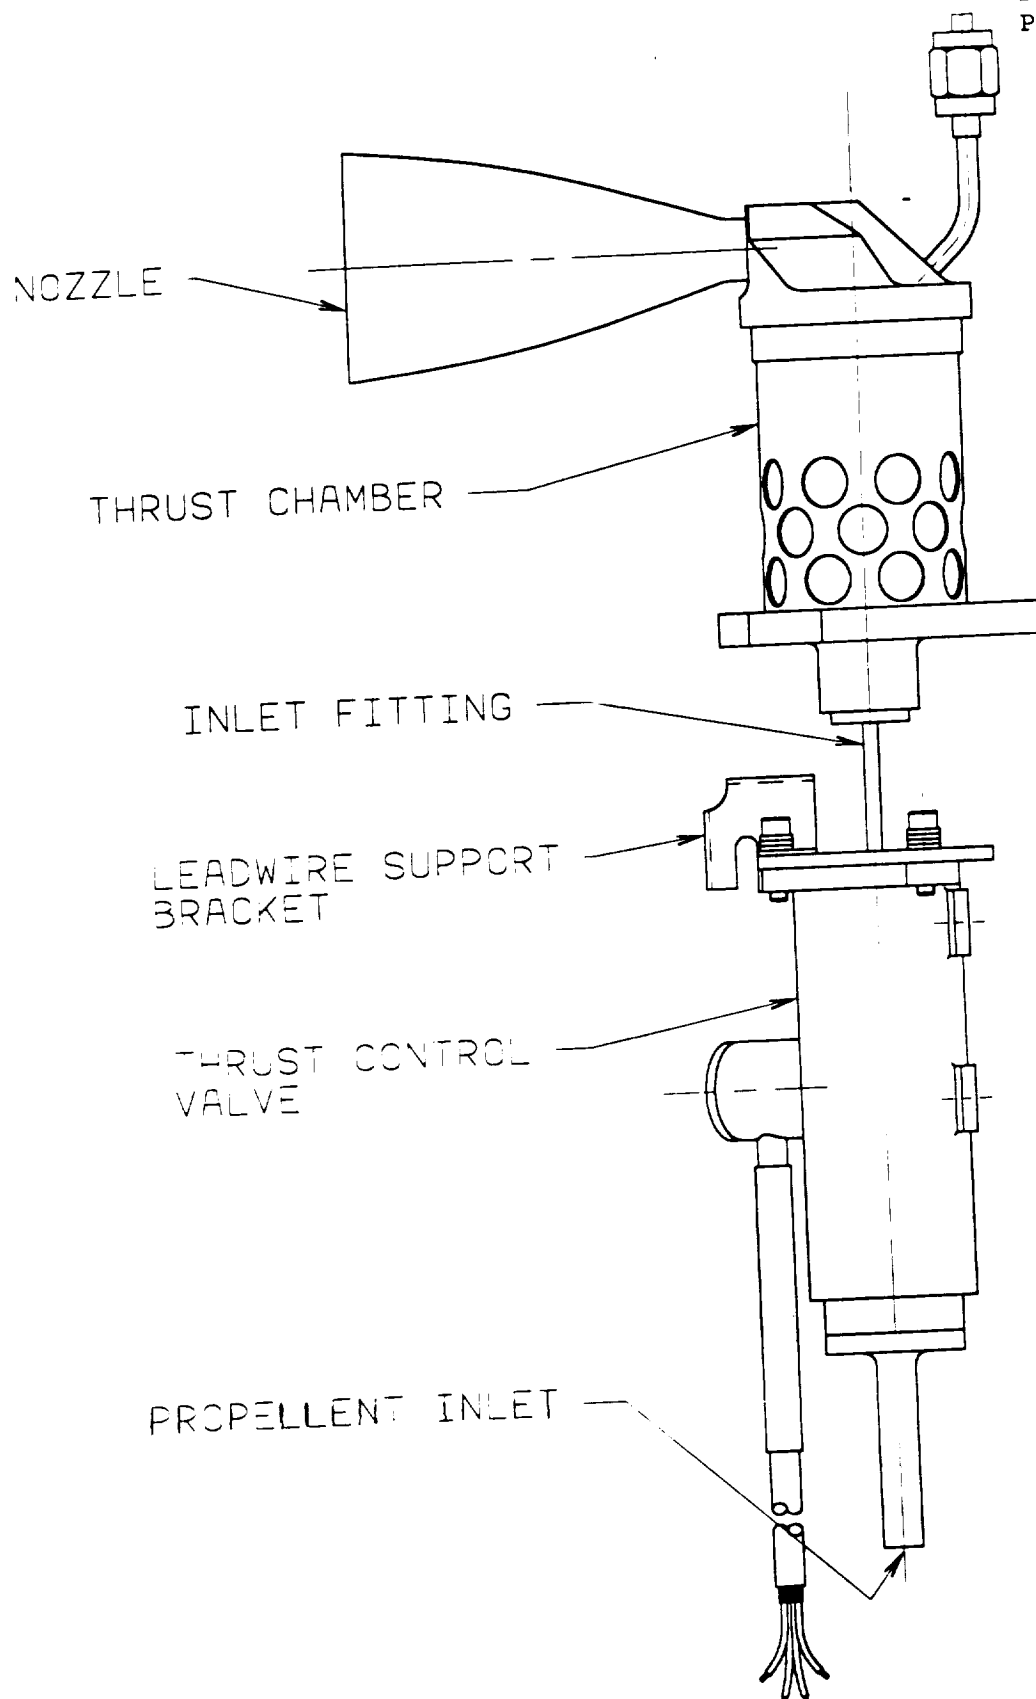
TRMM Rocket Engine Assembly (REA)
